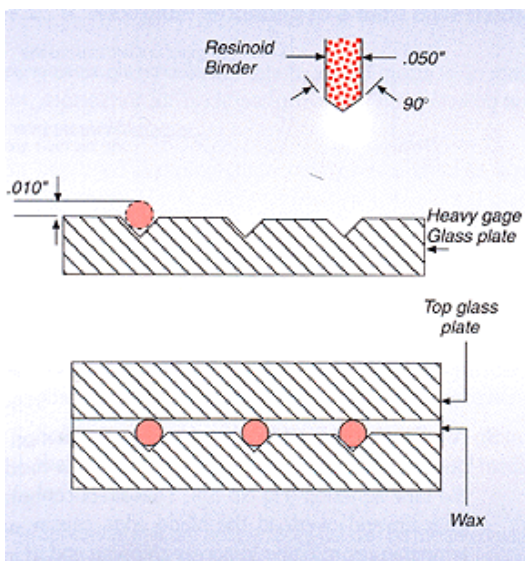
Grinding -V- grooves in a glass fixture for mounting and trimming fiber optics
